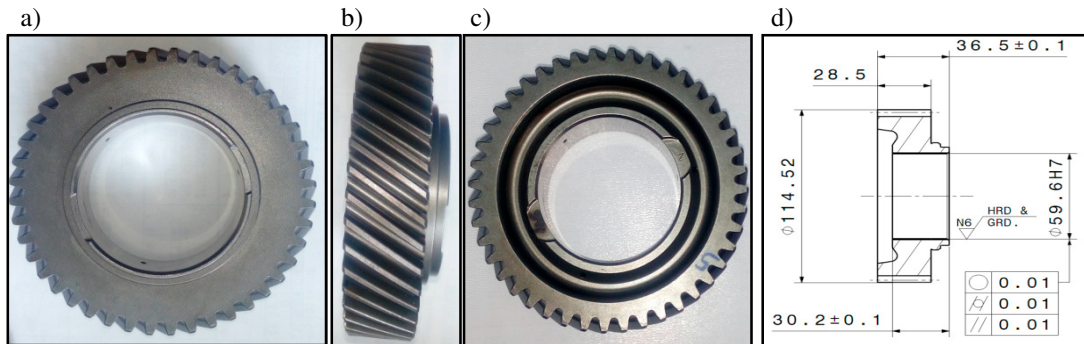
Workpiece & its dimensional specification: (a) RH side view, (b) Front view, (c) LH side view, (d) part drawing
